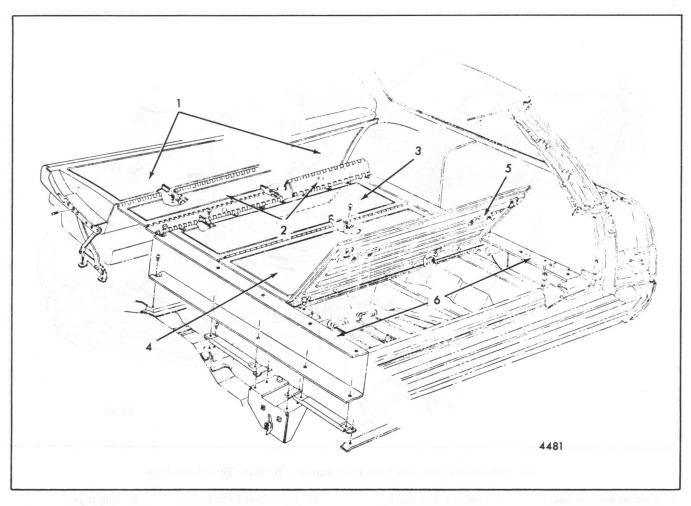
Folding Seats and Load Floor Panels - "A and B" Body Two-Seat Styles
